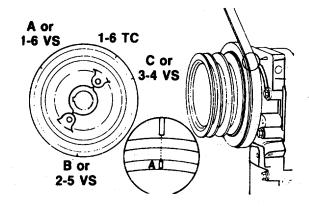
Aligning Pulley and Gear Pointer.
